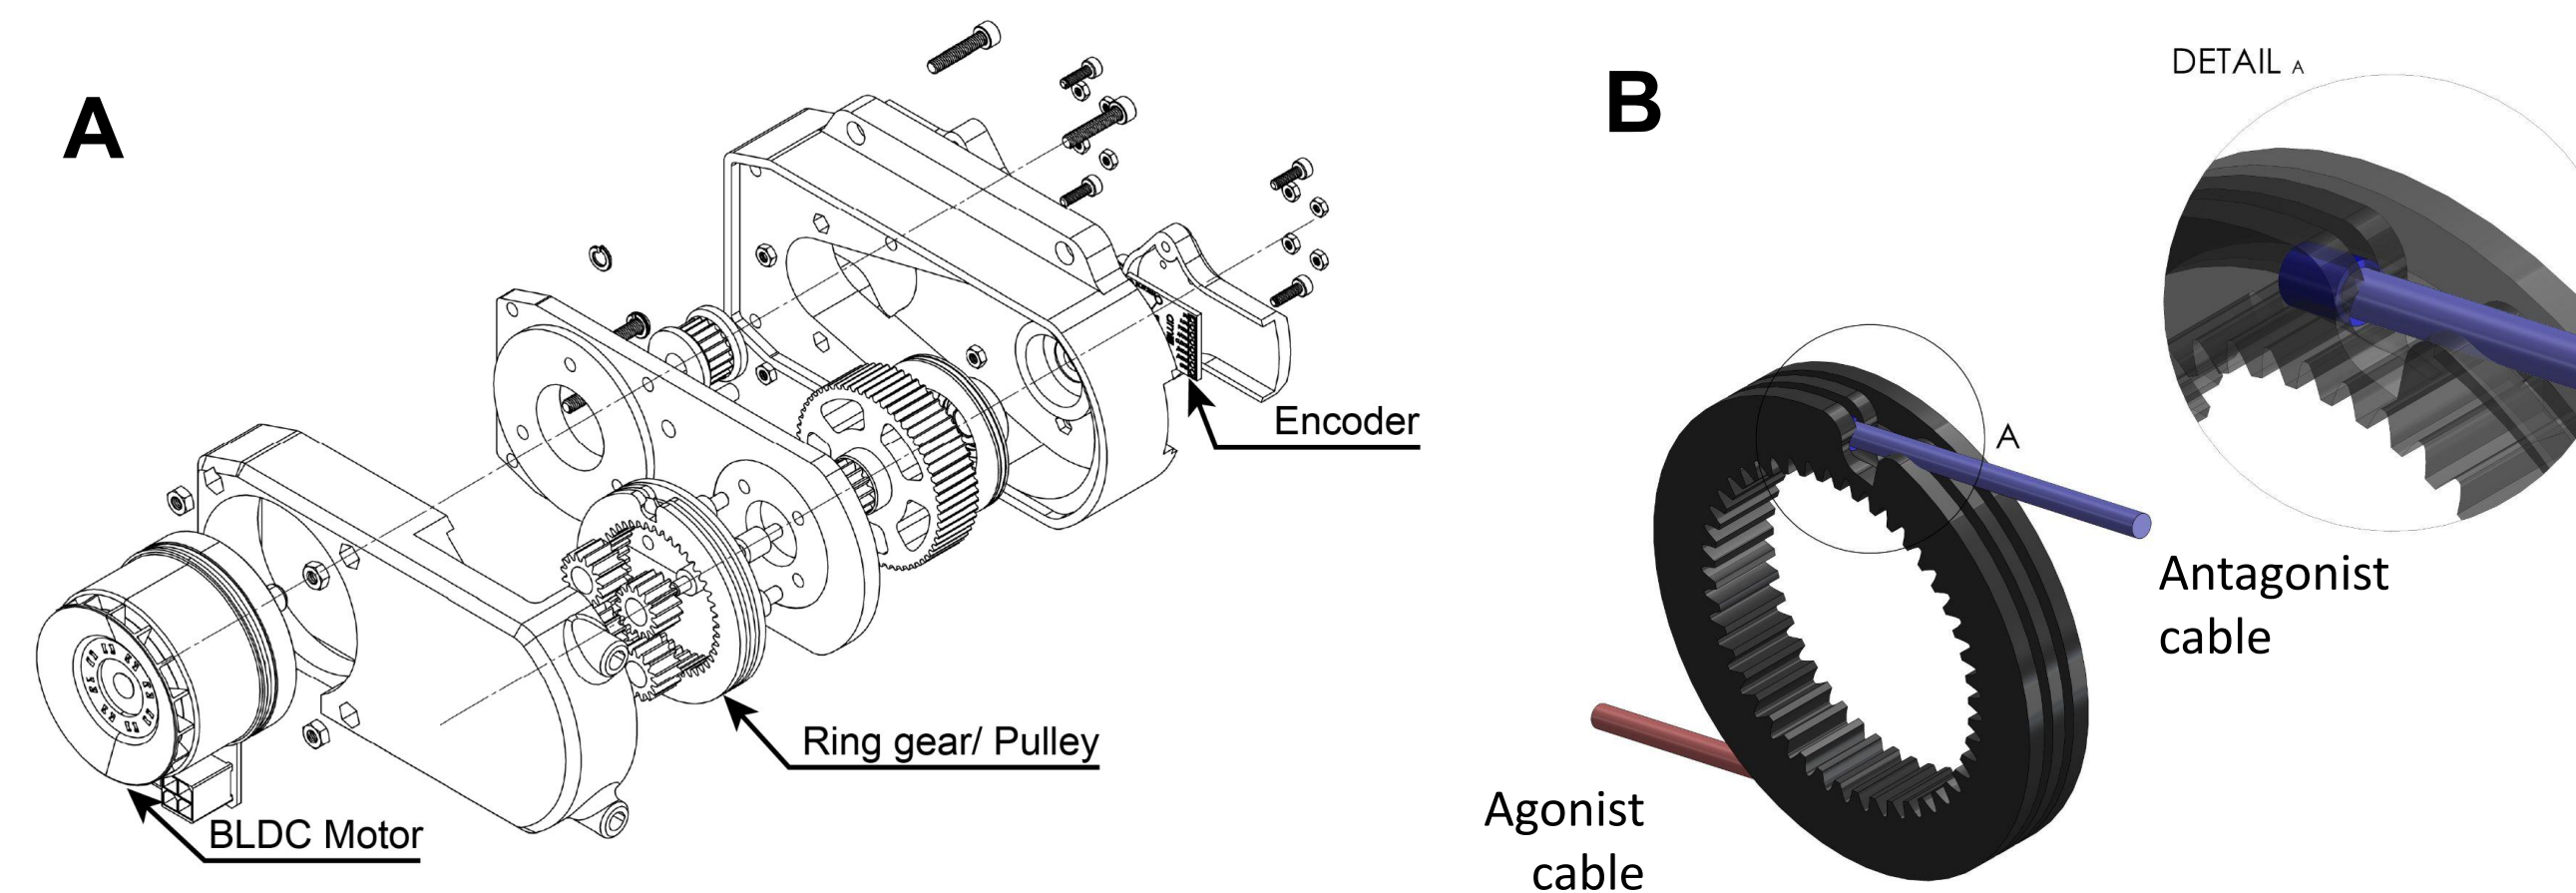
A: Exploded view of the 3D printed actuator. B: Detailed view of antagonist cable pulley.
